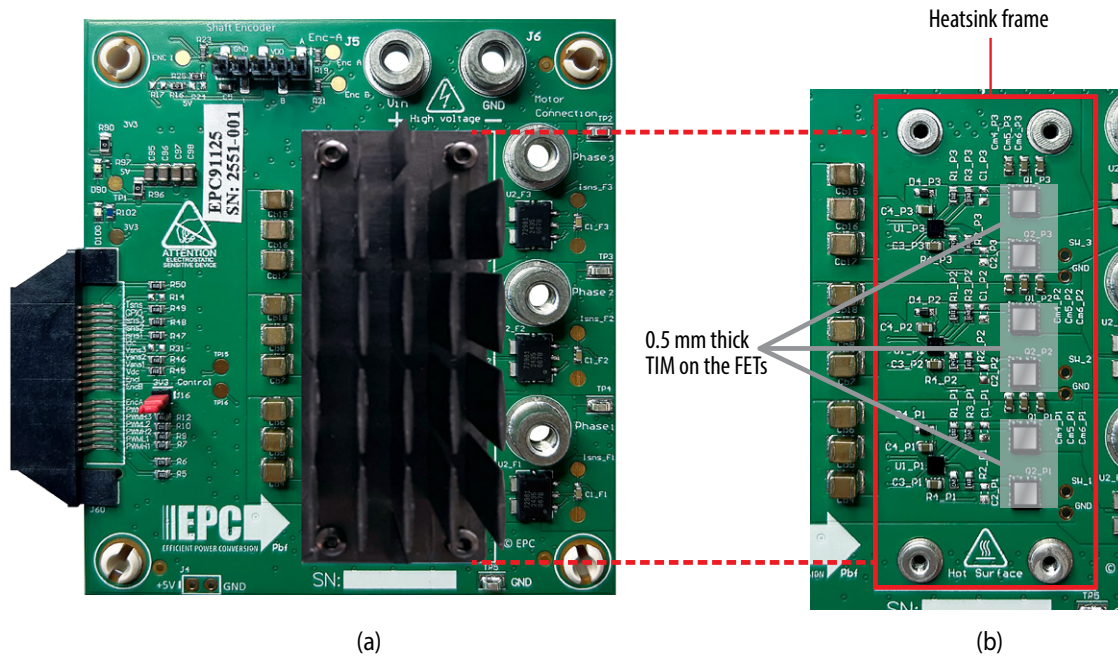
(a) passive heatsink mounted on EPC91125 board (b) details on TIM placement
